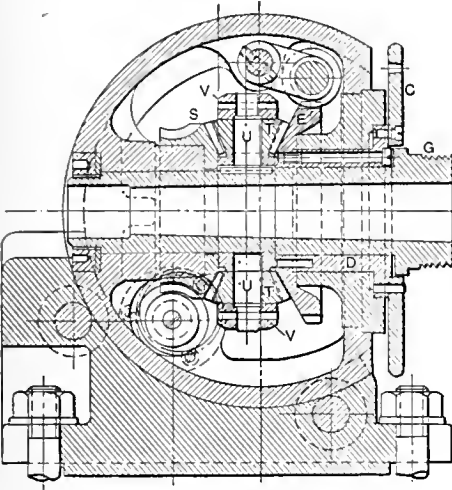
Dividing Head for Universal Milling Machine which indexes Work Automatically
